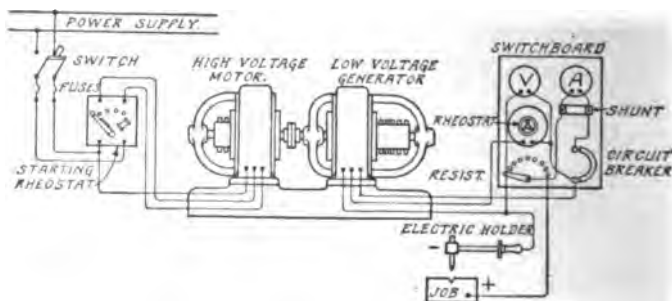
Elementary Low-Voltage Arc-Welding Equipment
